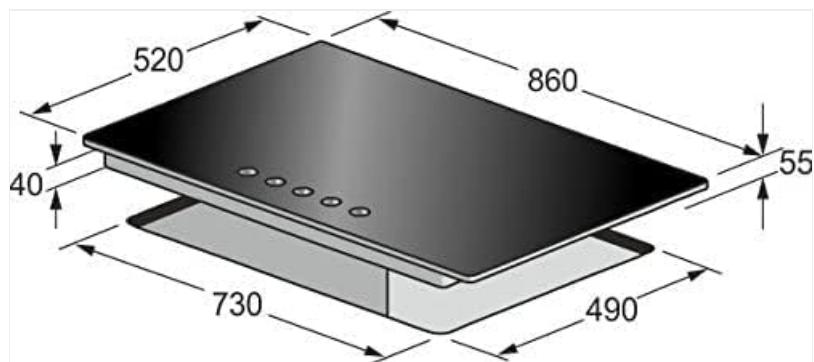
Technical drawing showing the dimensions of the Kaiser KCG 9386 gas hob and required cut-out for installation. Dimensions are in millimeters.
